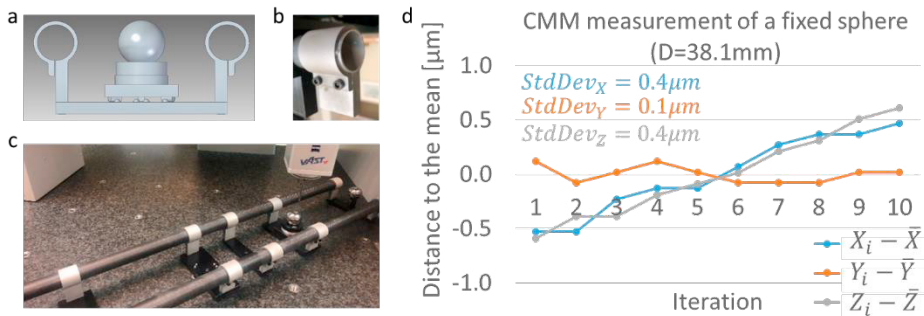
a) Model of the flanges in prototype 3. b) Detail of the flange embracing a tube. c) Prototype 3 with the new flanges and the carbon fibre tubes during performance test in CMM. d) CMM measuring a fixed sphere (Diameter 38.1mm), distance to the mean of the ten iterations in mm and standard deviation of the sample x, Y and Z coordinates.
